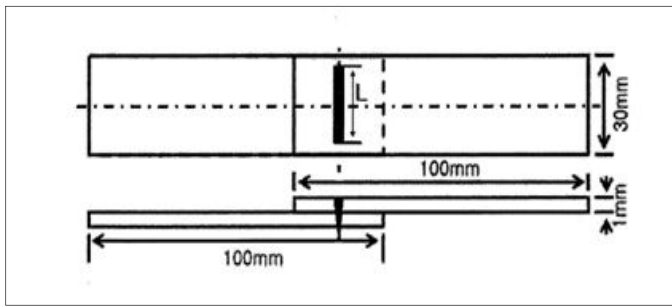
Laser welded specimen geometry for Tensile-Shear Test
